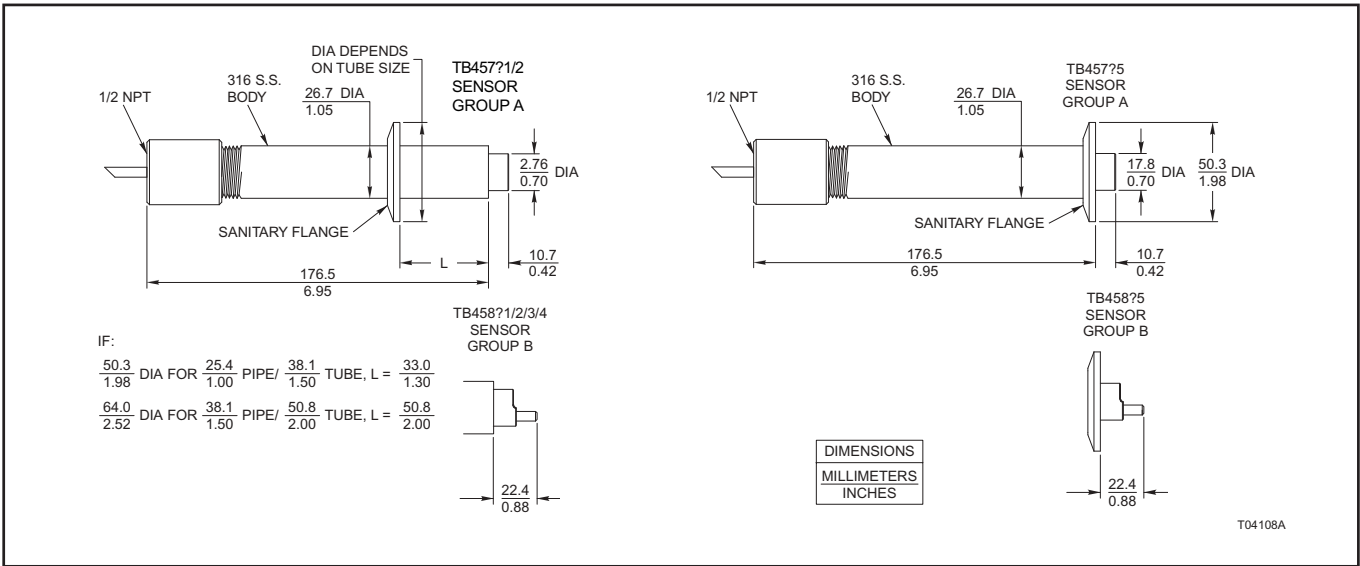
Endura TB457 & TB458 Sensor Dimensions
